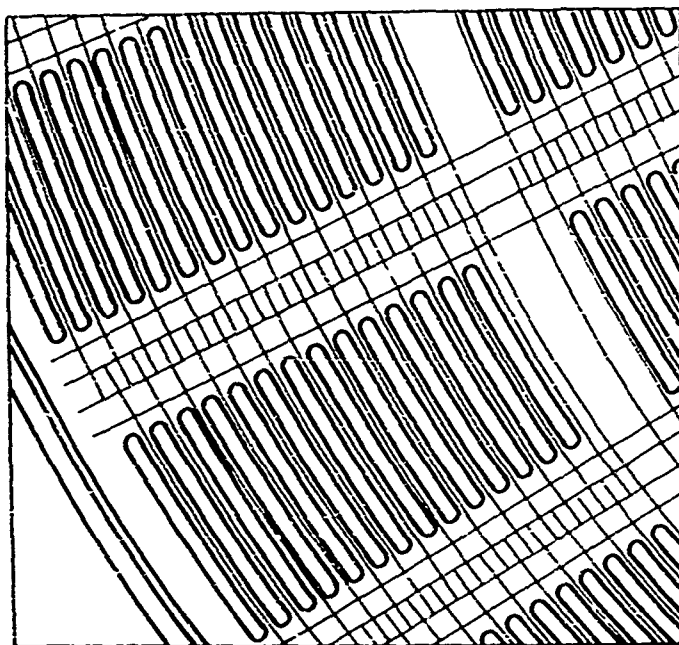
SCHEMATIC OF SEAM WELDS USED IN MERCURY CAPSULE (REF. 91)
